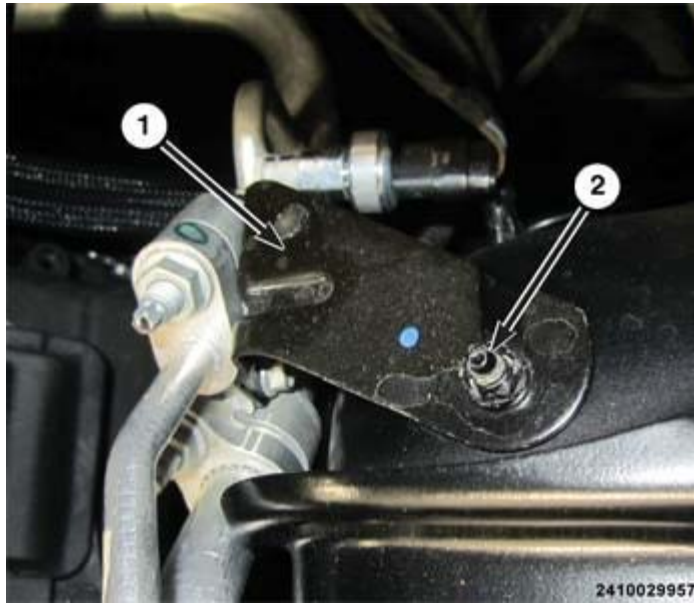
Refrigerant Line Mounting Bracket & Nut
